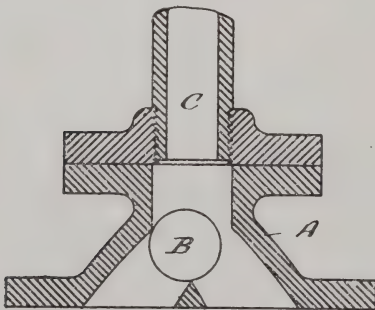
SECTIONAL ELEVATION OF THE VALVE-CHEST OF PULSATING STEAM-PUMP, MADE BY THE PULSOMETER ENGINEERING CO., LTD., LONDON.
